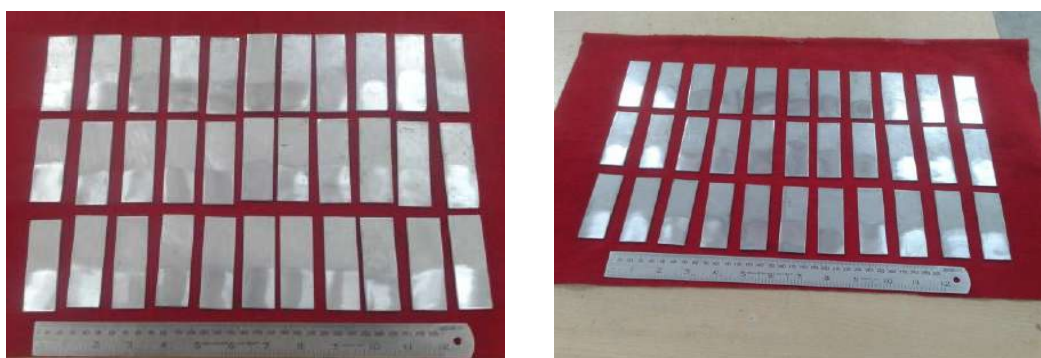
Photographic view of the AIS5052-AISI1020 samples before the weld
